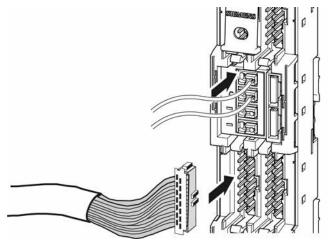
Connecting the supply voltage cables and connecting cables to the front connector module (example)
